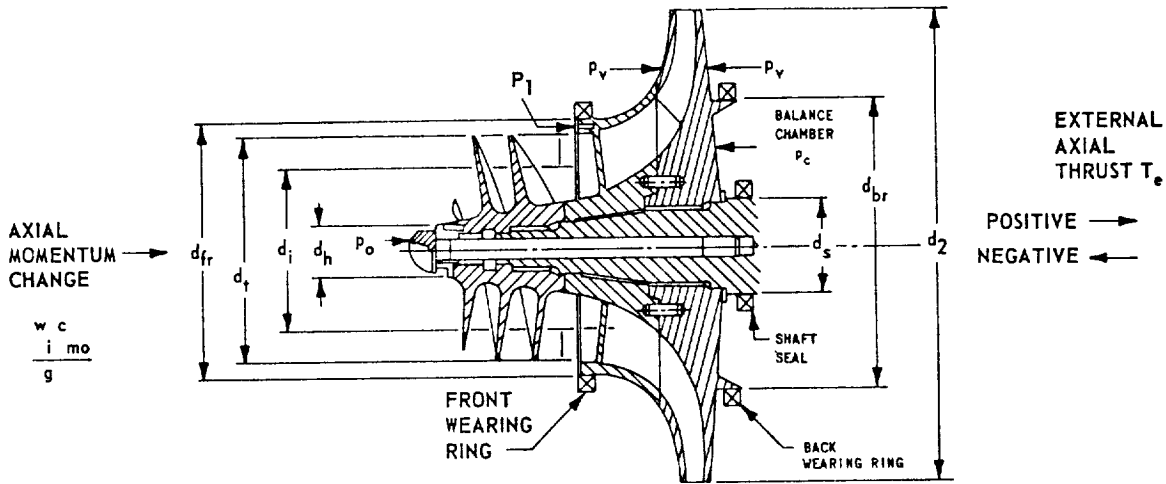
Balancing axial thrusts of a centrifugal pump by the balance chamber method.
